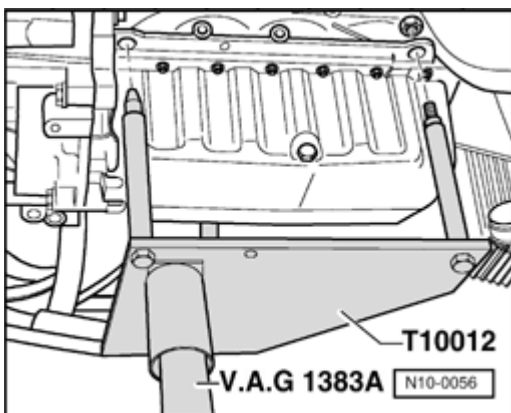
Identifying Engine Bracket T10012 & Engine/Transmission Jack V.A.G. 1383A
